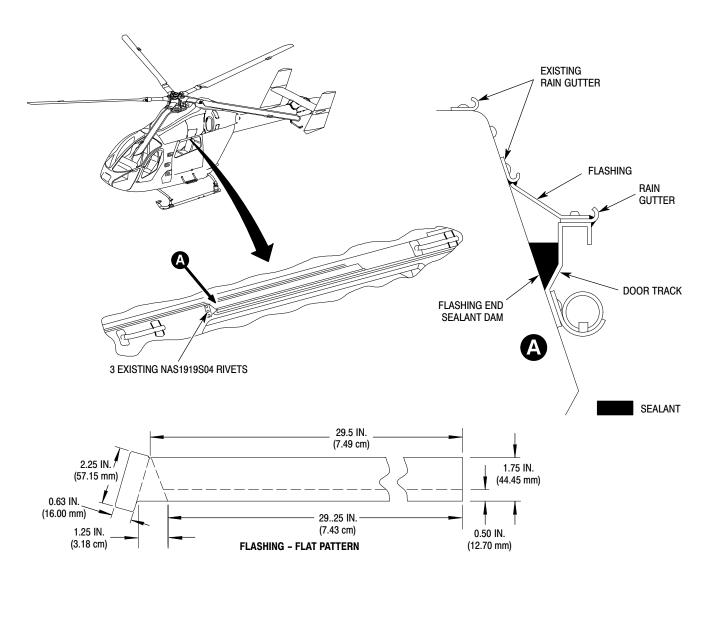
Rain Gutter and Flashing Installation, and Flashing Detail
